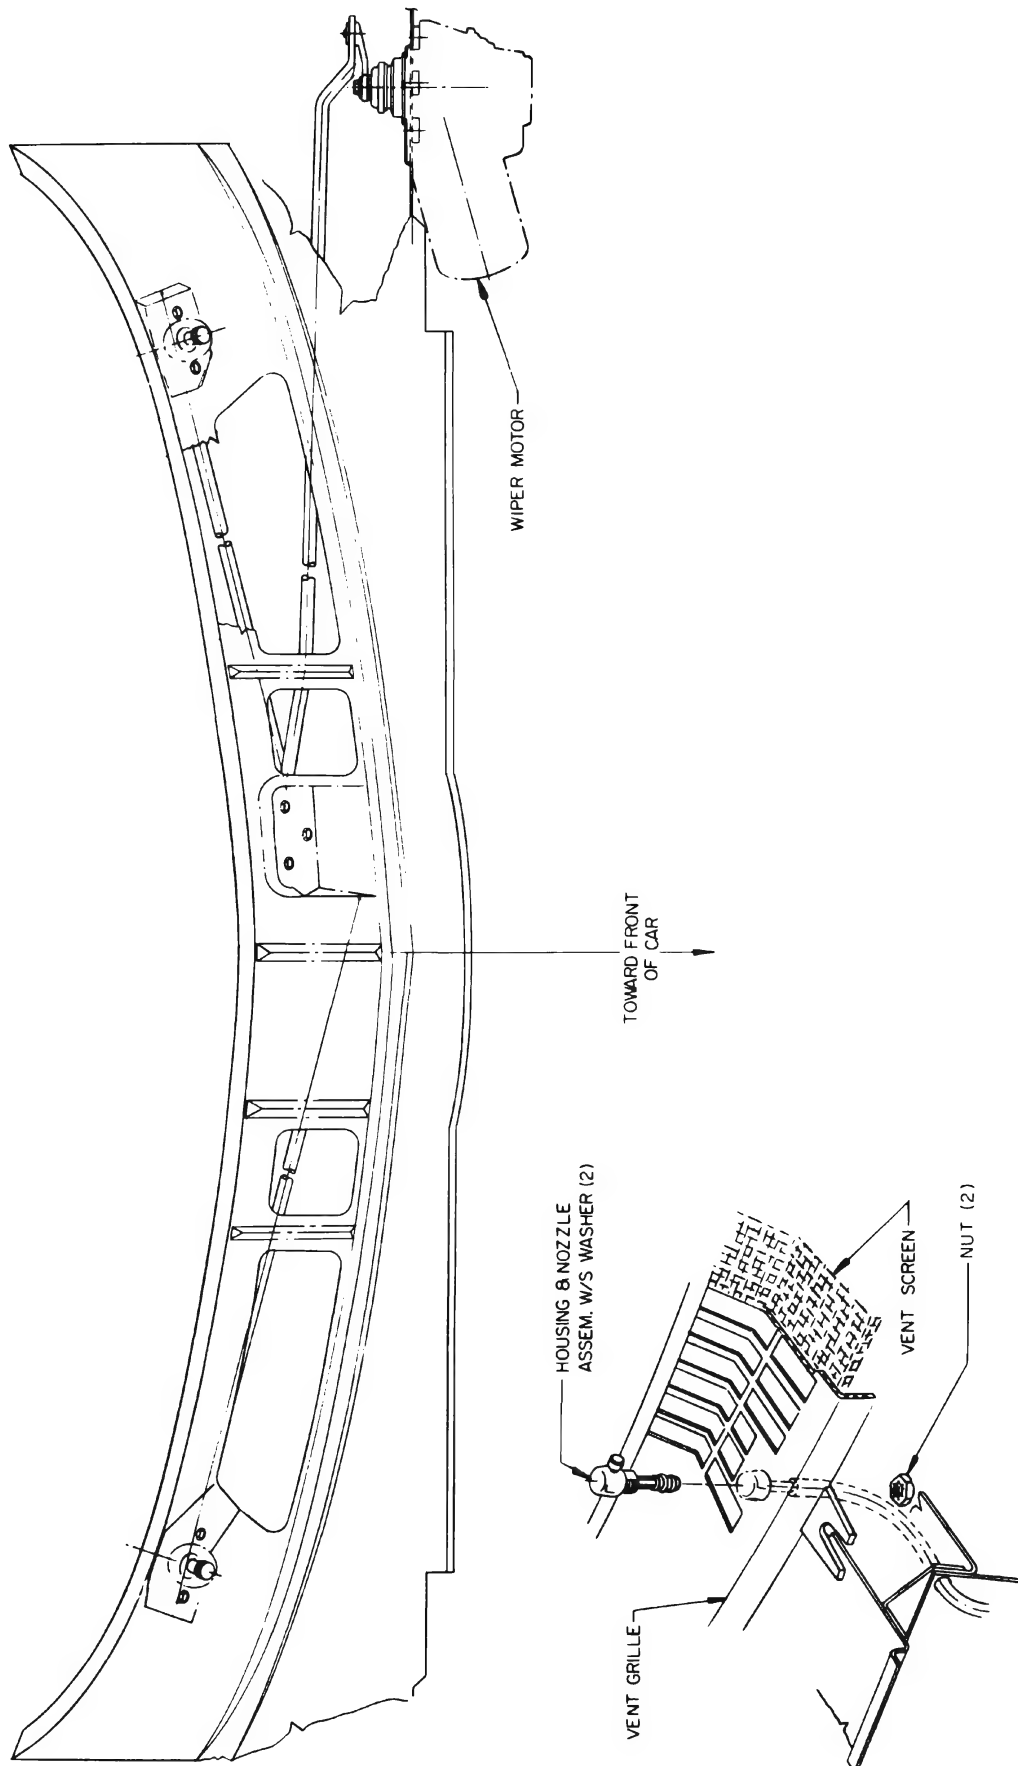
Windshield Wiper Linkage and Washer Nozzle Mounting—Riviera
